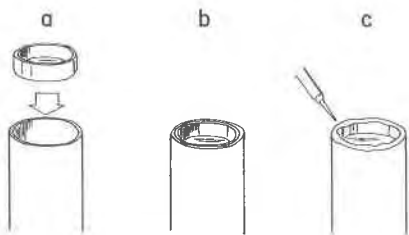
The "ash can" closure involves insertion of a prefabricated end piece (a-b), followed by a circular weld around the rim of the capsule.
